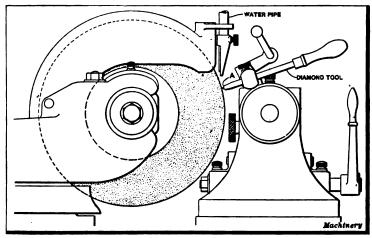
Truing Face of Grinding Wheel by use of Diamond Tool
